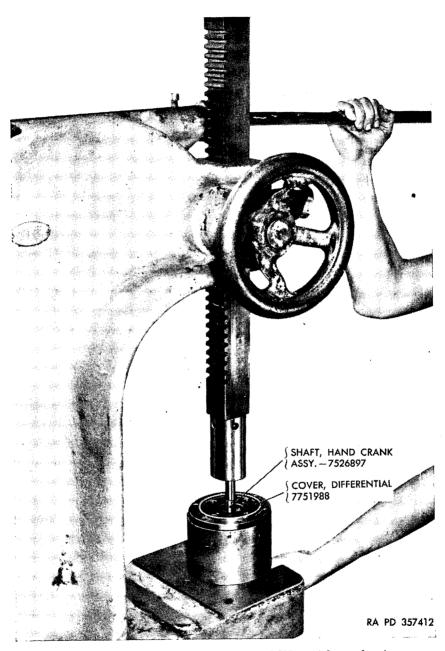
Pressing hand crank shaft out of differential cover bearing.
